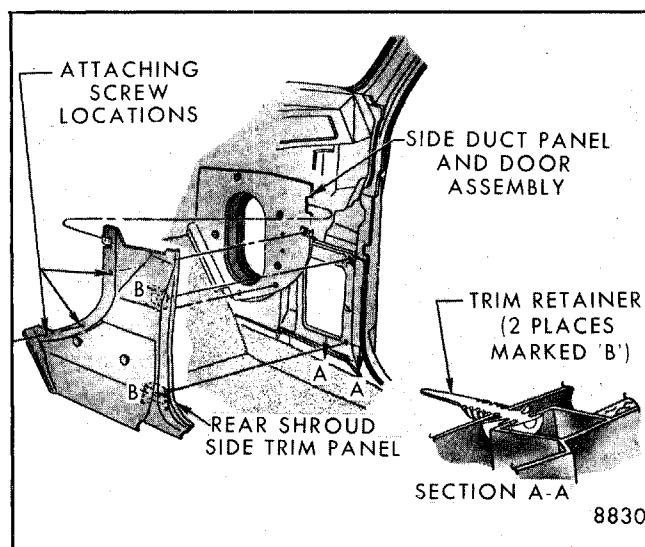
Rear Shroud Trim Panel - Right Side
